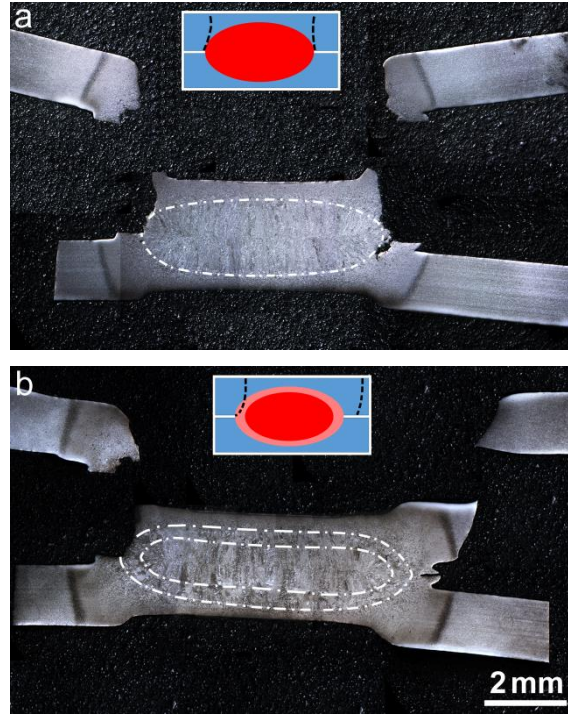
Cross sectional view of cross-tension tested single pulse weld (a) and double pulse weld (b) with an insert schemetically showing the fracture path.
